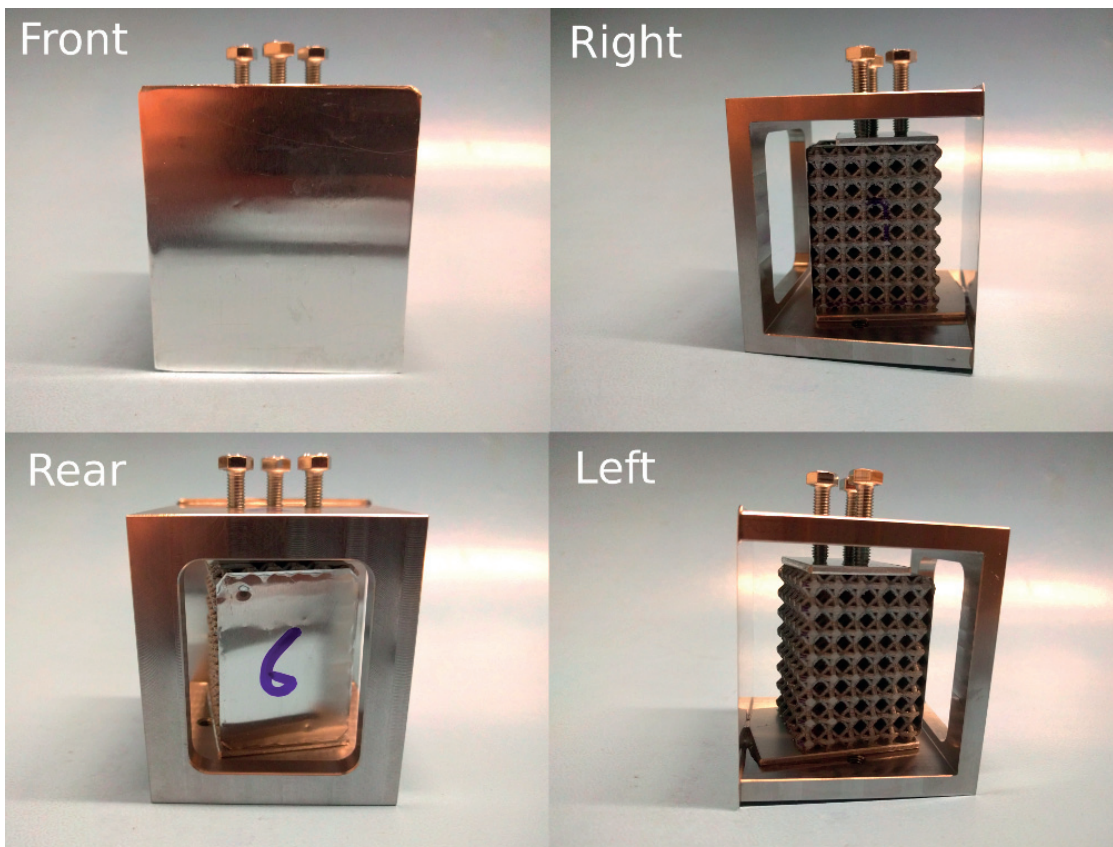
Fully assembled sample. Reproduced from [216].
